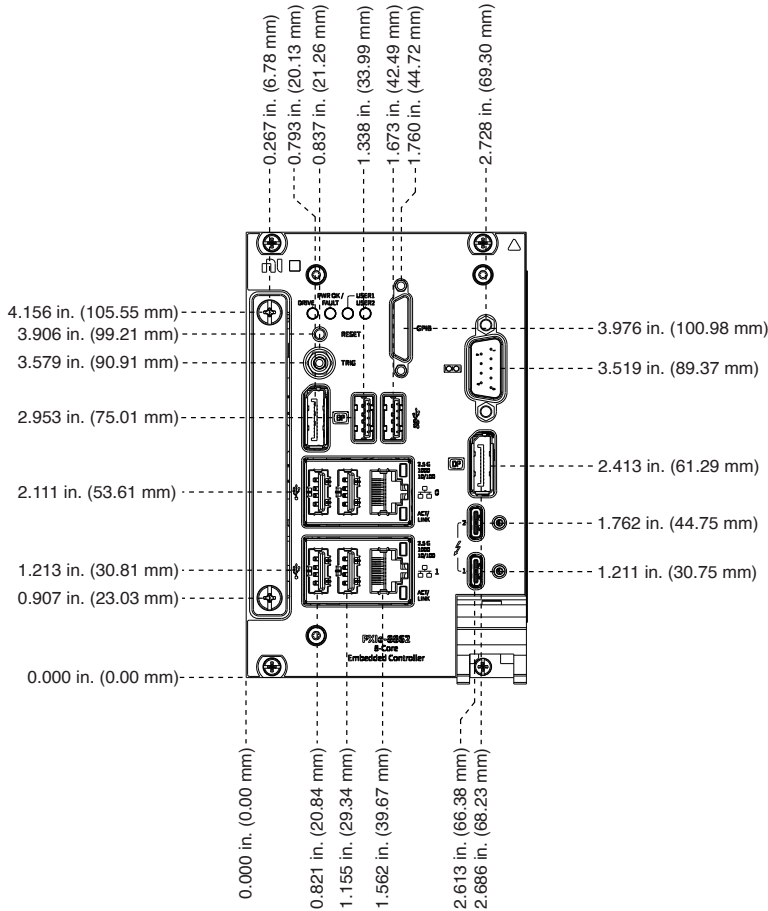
PXle-8862 with Removable Drive Front Panel Layout and Dimensions
